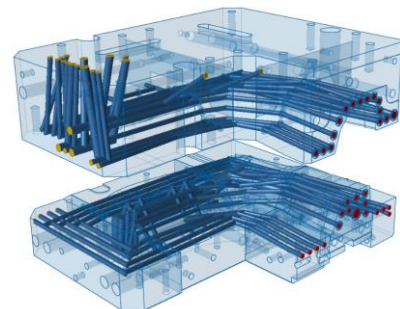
Lower and Upper Cooling Channel for the Test Part
